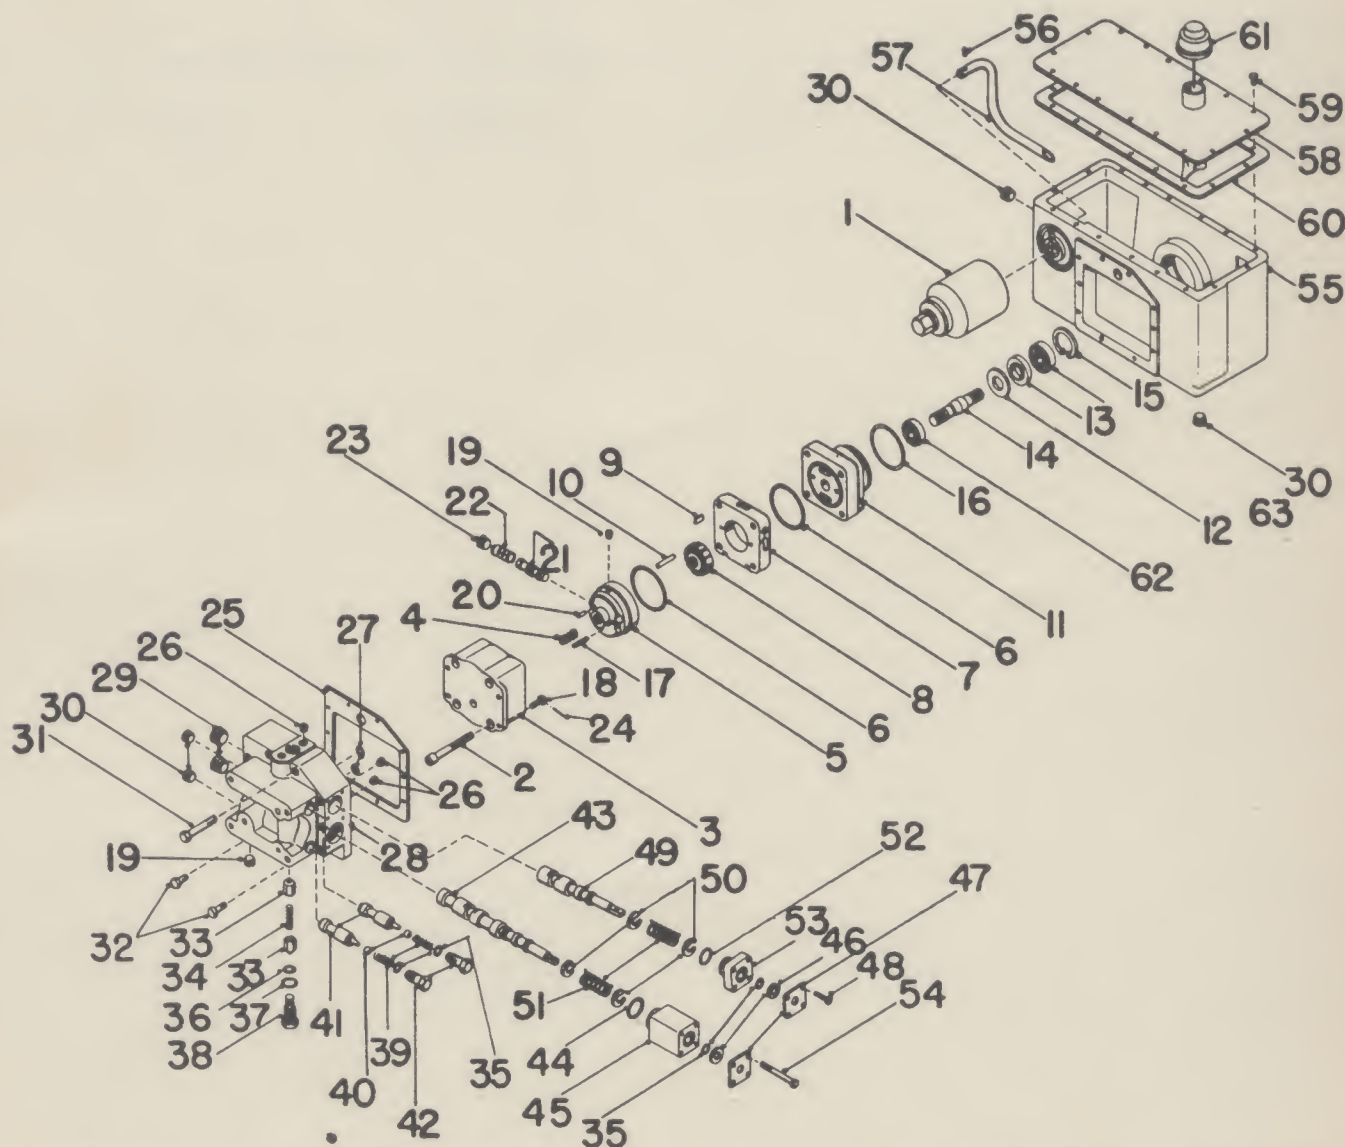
Exploded view of the Oliver 7AS-2043-A hydraulic system depth control type. Pump shown here is also used on non-depth control system, the control valve for which is shown in Fig. 0635.
